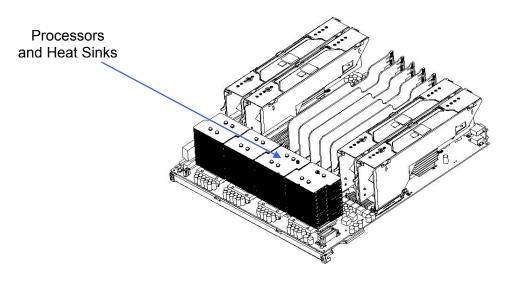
Mainboard and Sheet Metal Tray, Assembly
